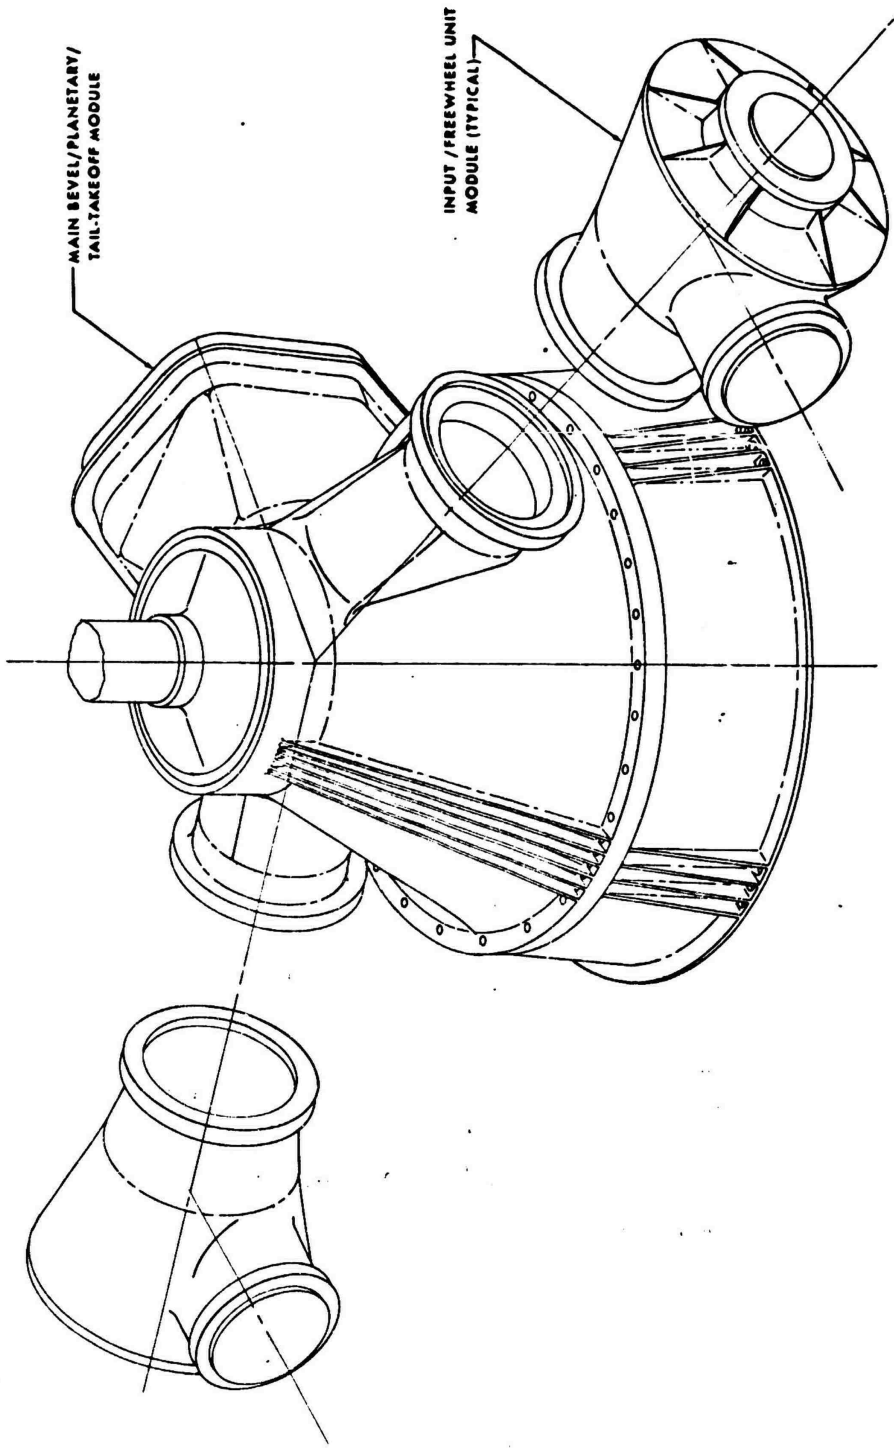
Exploded Isometric Drawing of CH-54B Main Transmission, Three-Module Configuration.
